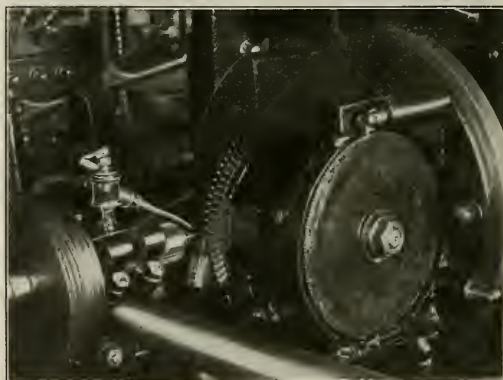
MACHINE FOR CUTTING BUCKETS ON TURBINE WHEELS
